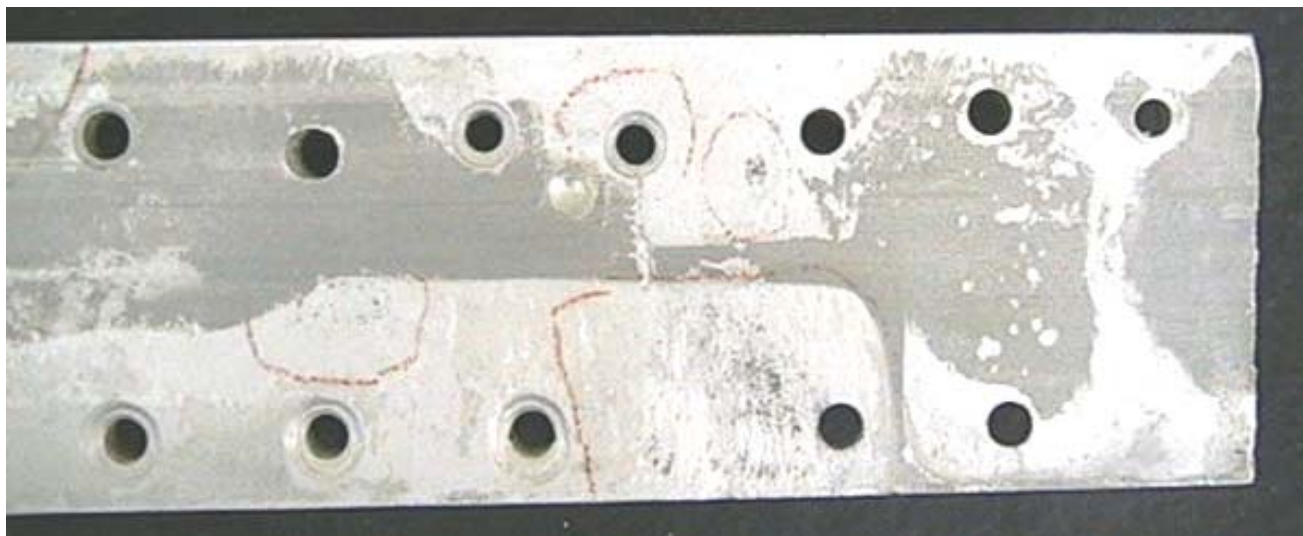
Wear on the Cessna 402C Right Wing Front Spar Lower Cap
